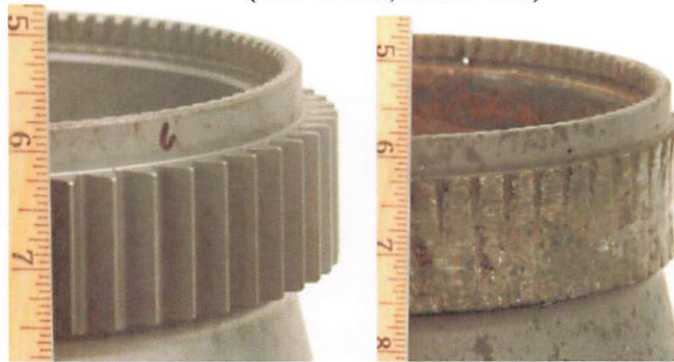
Cleaned HS Planetary Assembly (Tab J-427)
